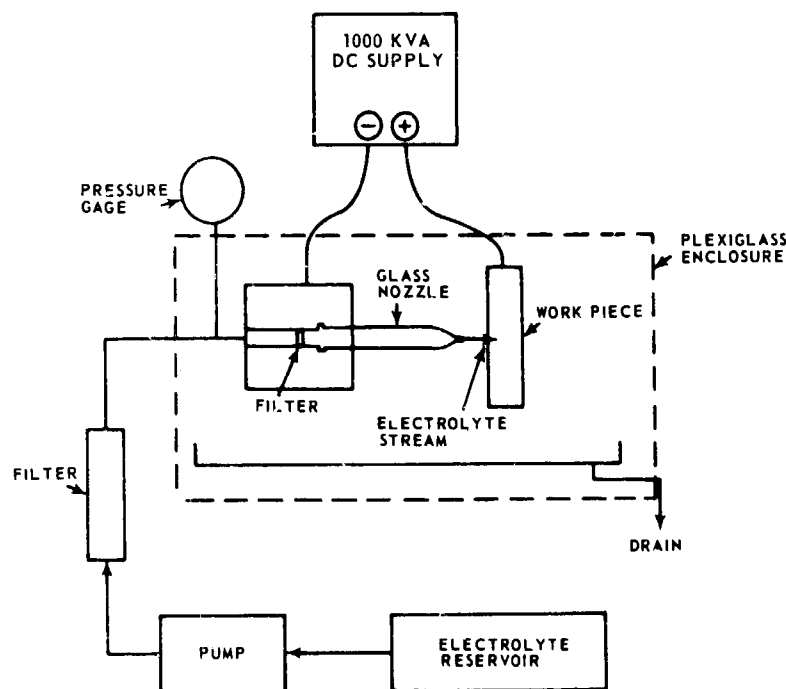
Schematic Diagram of ECID Hole-Drilling Equipment
